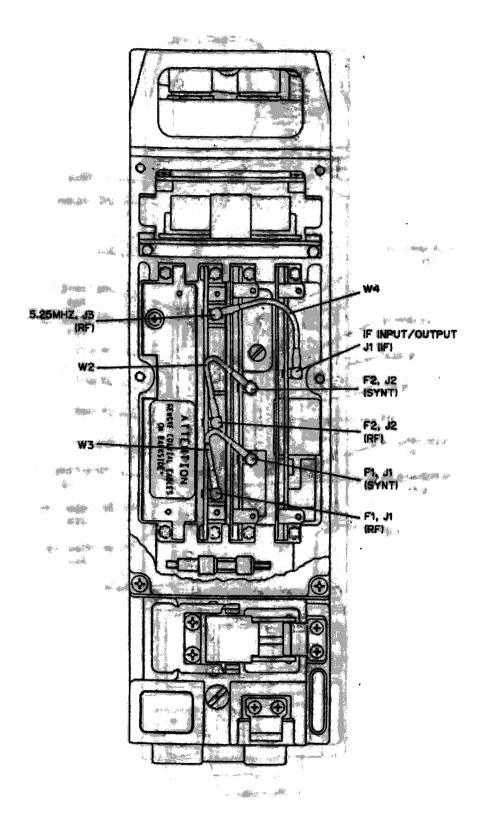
B. View on Modules Side (Sheet 2 of 2)
